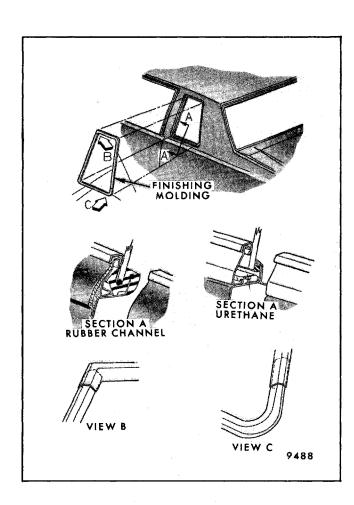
Outside Loaded Quarter Window - C Styles Typical
